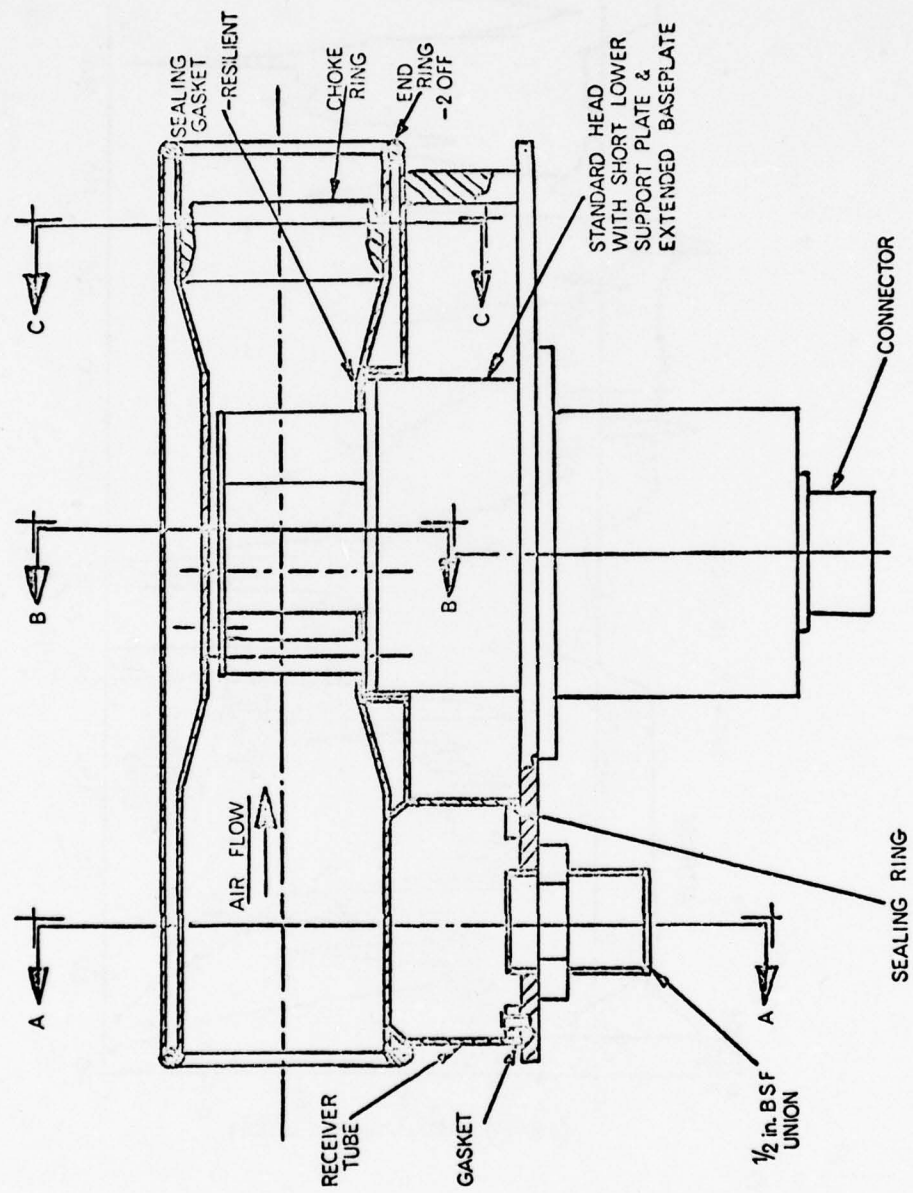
SECTIONAL VIEW OF ICE DETECTOR AIRFLOW INDUCER
